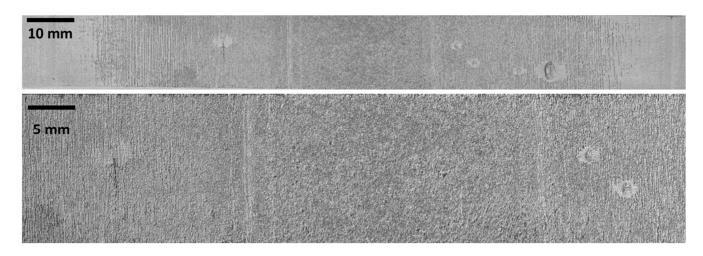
Visual appearance of weld specimen tested at condition E
